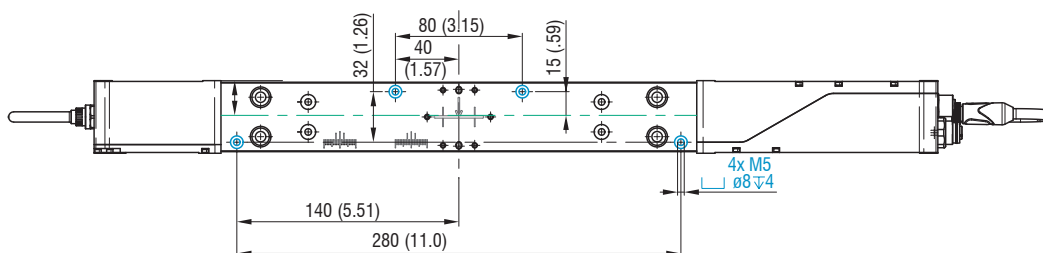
Dimensional Drawing of Mounting Rail, Standard Mounting Method
